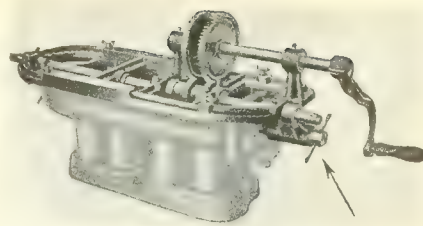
Fixture for line reaming of the bearings. It is important that the finished bearing be the correct distance below the lower surface of the block
